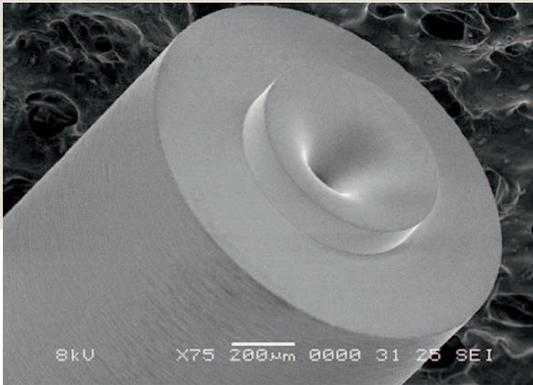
Exceptional freedom of design for component shapes in ZrO_2 - sintered drill-hole geometry with outlet in final form.
